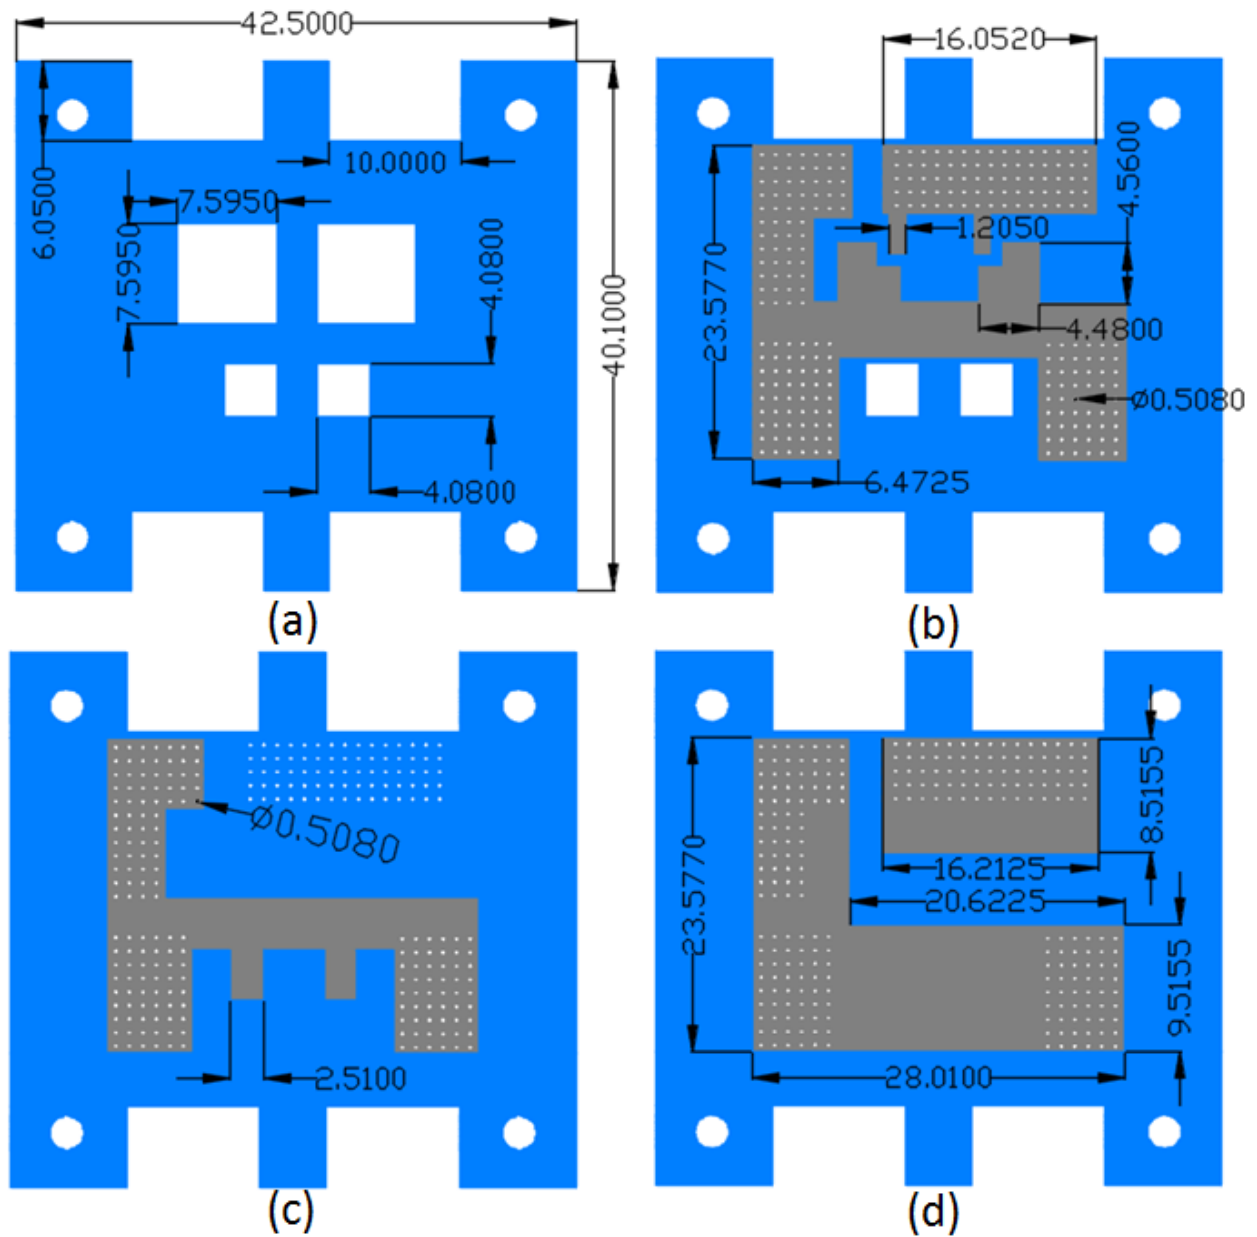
Dimensions in mm for LTCC interposer (a) layer 1 (b) layer 2 (c) layer 3 (d) layer 4
